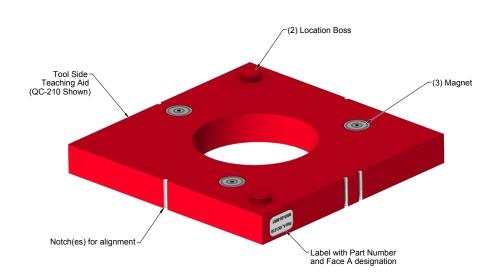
Tool Teaching Aid Assembly (QC-210-TEACH3 Shown)
